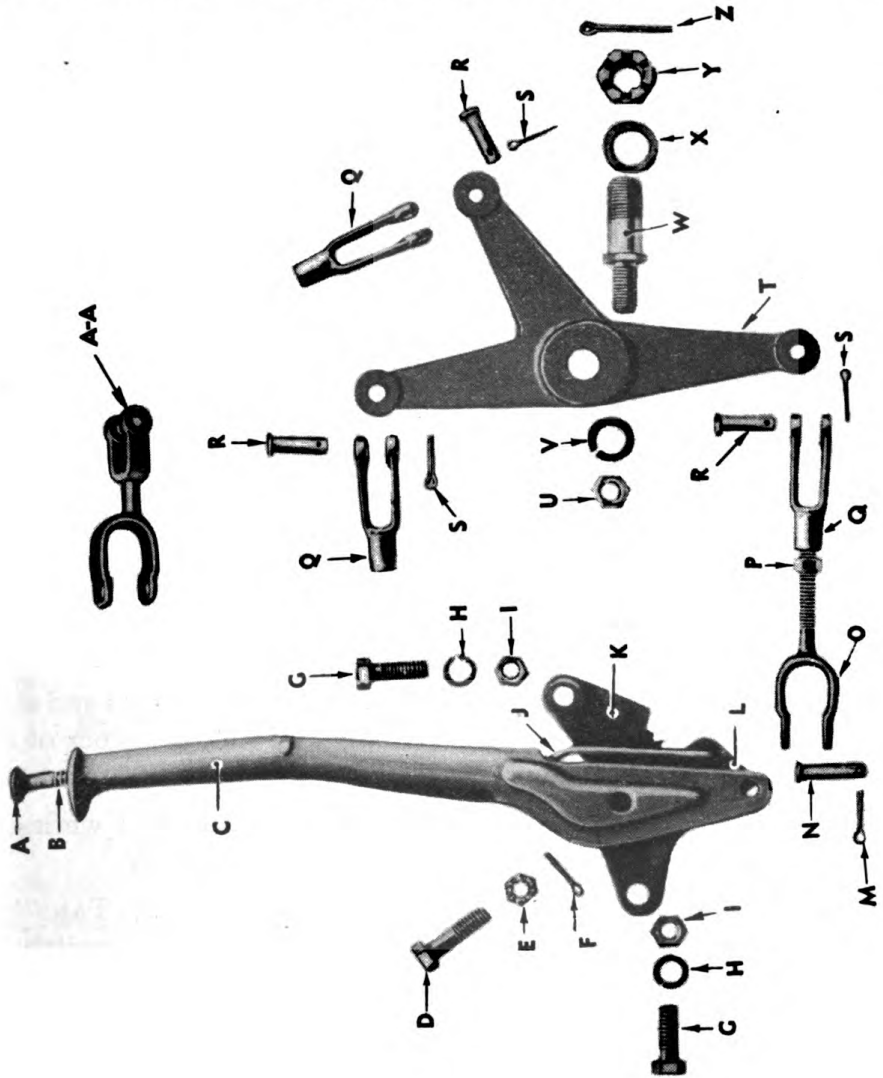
Brake Operating Lever and Bell Crank Assembly—Partially Disassembled
